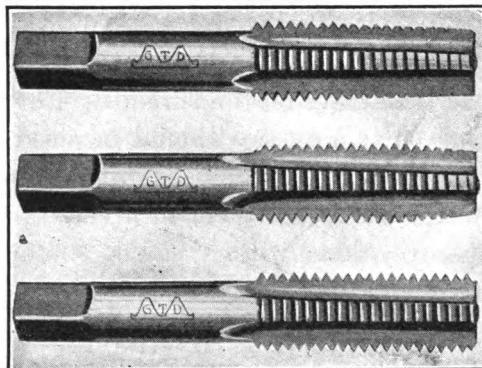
A taper tap is shown at the top. The center shows a plug tap and a bottoming tap is illustrated at the bottom
